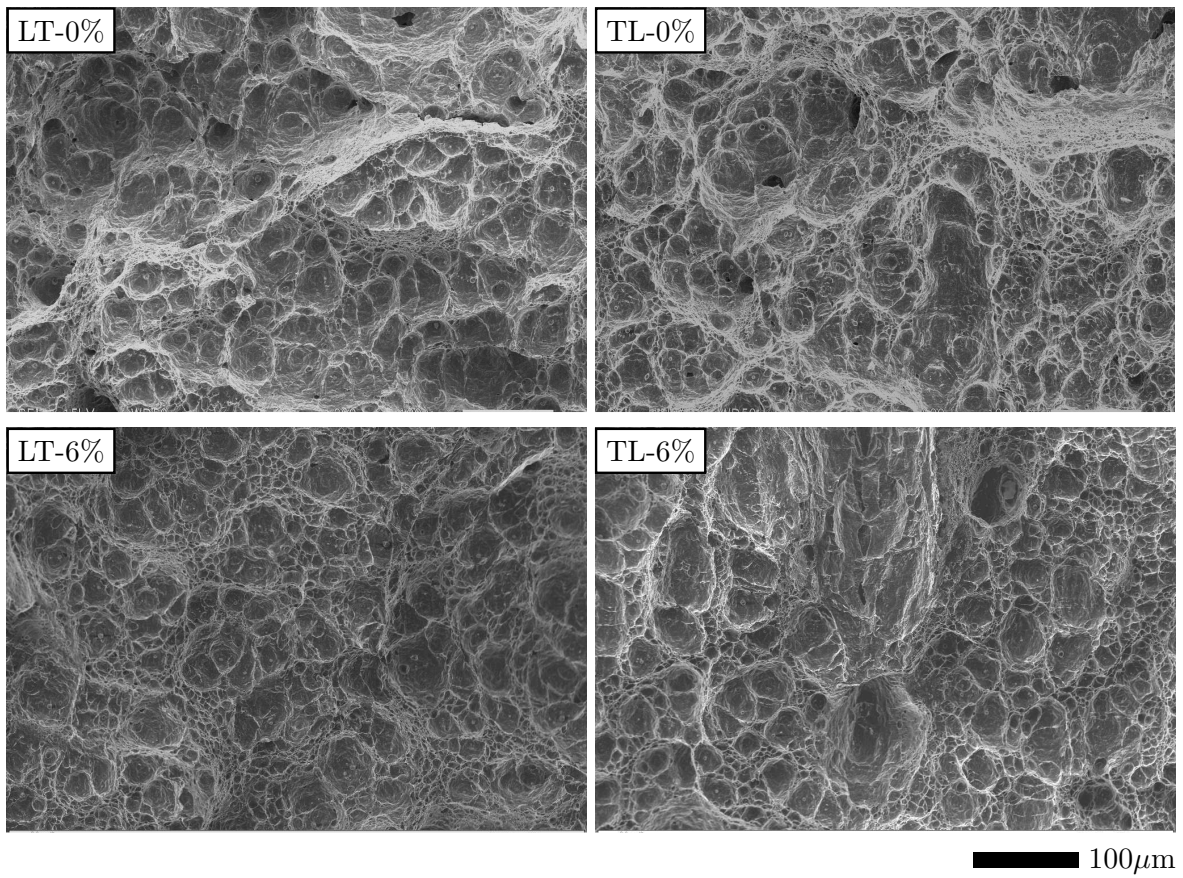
Fracture surfaces of C(T) specimens for the as-received and 6% prestrained materials
